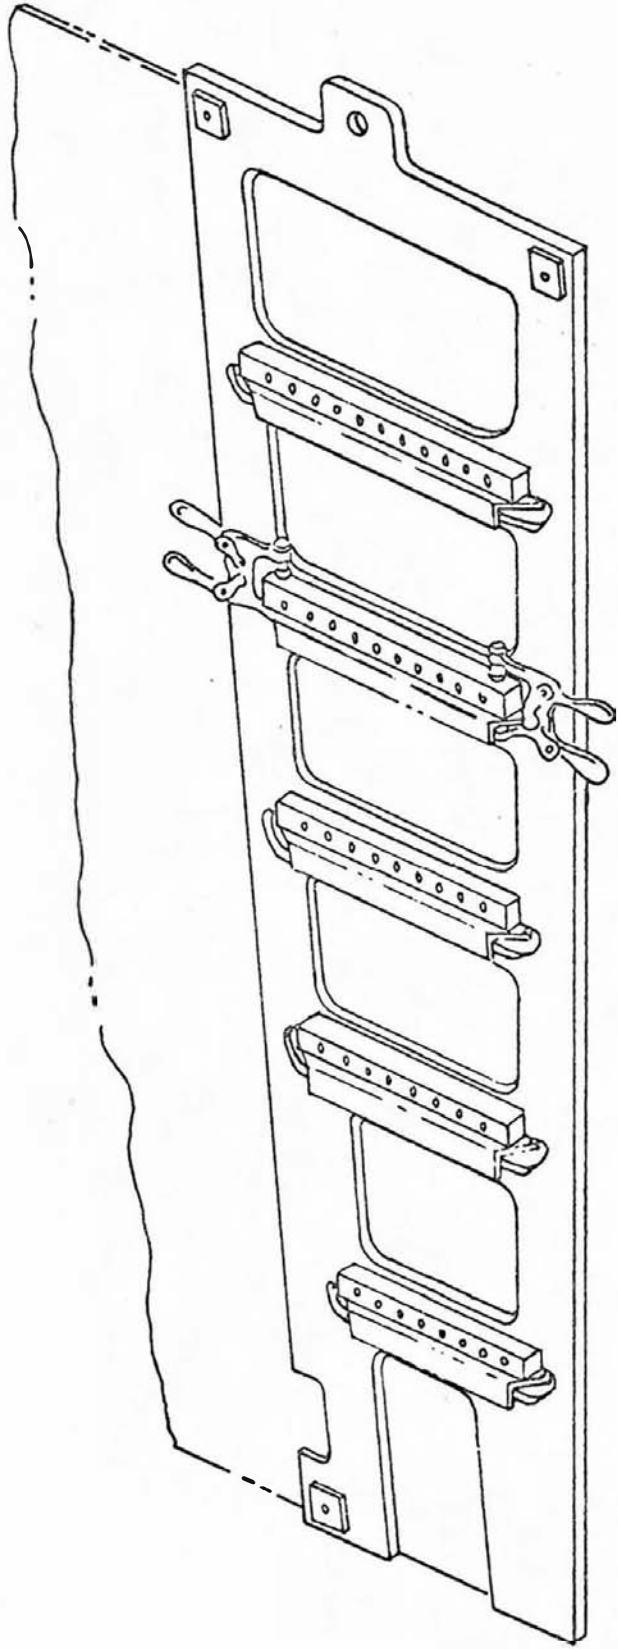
Center Engine Support Web Assemblies Locating Drill Jig
